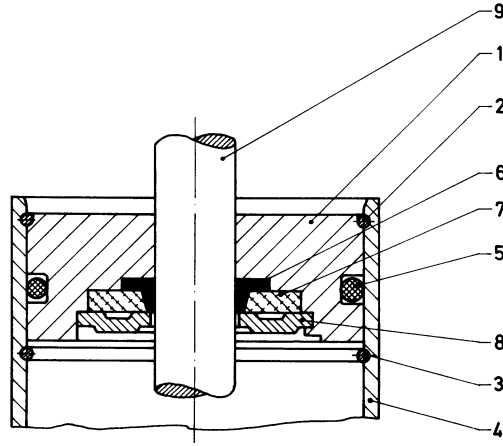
Seal package developed by Bilstein, which keeps the temperature range of -40°C to $+200^{\circ}\text{C}$ demanded by the automobile industry. The outer piston rod guide 1 has a hard-coated hole and is made of an aluminium wrought alloy (e.g. AlMgSi 1 F 28). The piston rod 9 has the diameter $d = 11^{-0.02}$ and the hole has the tolerance range
